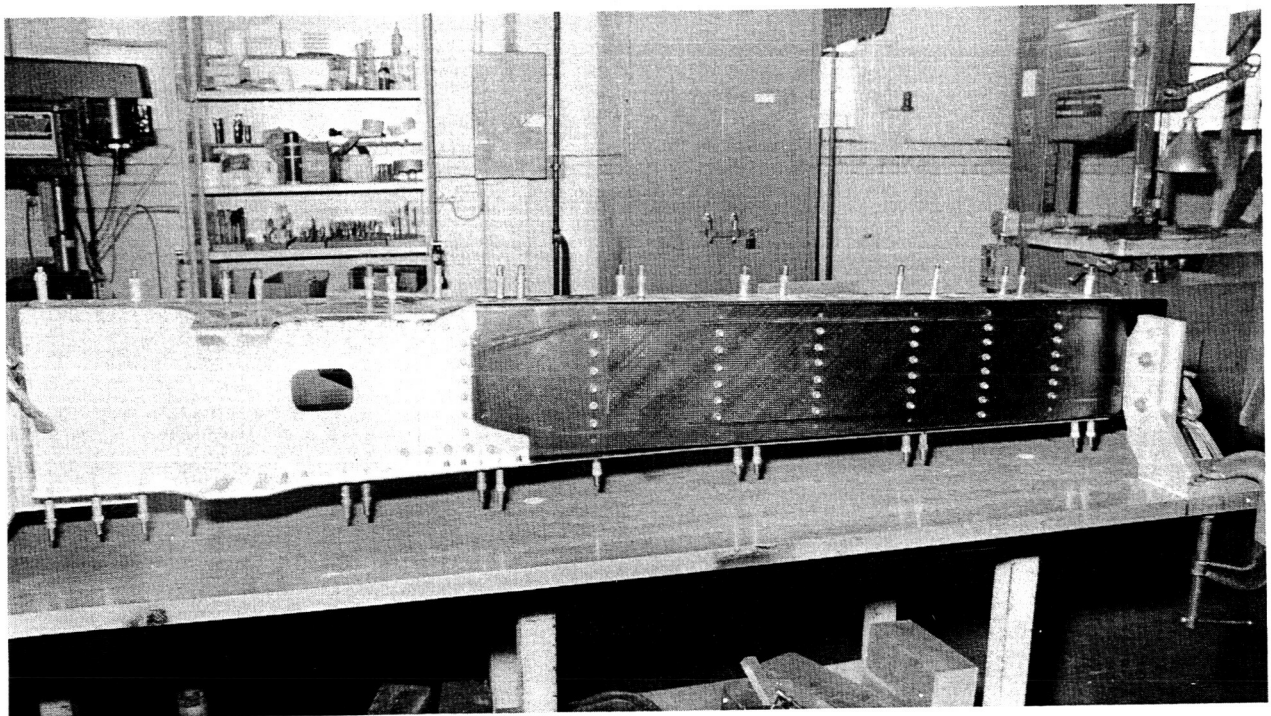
Spar/Aluminum Splice (Test 11) Showing Test Part Being Assembled
